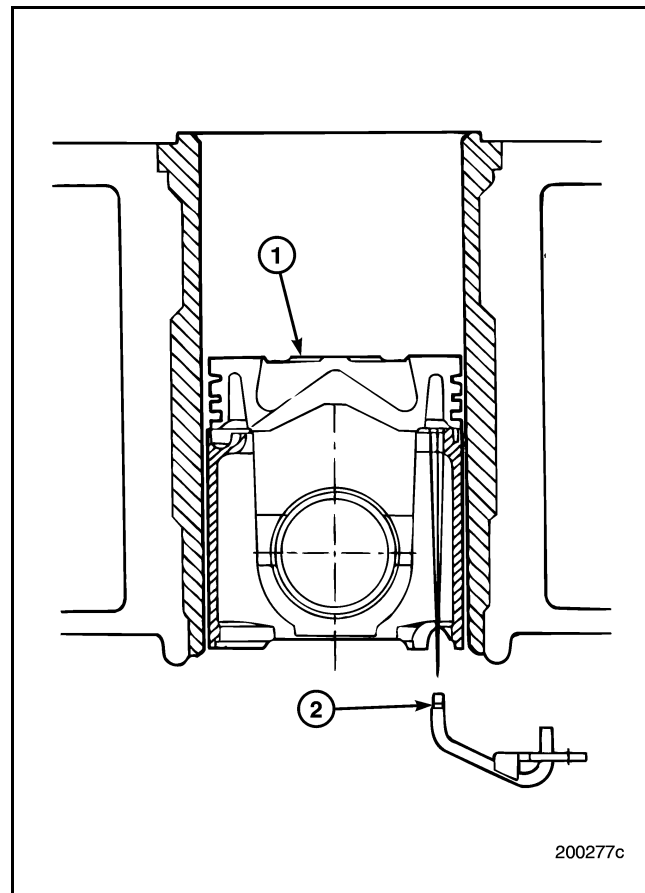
Spray Nozzle Pattern (with Two-Piece Piston)
